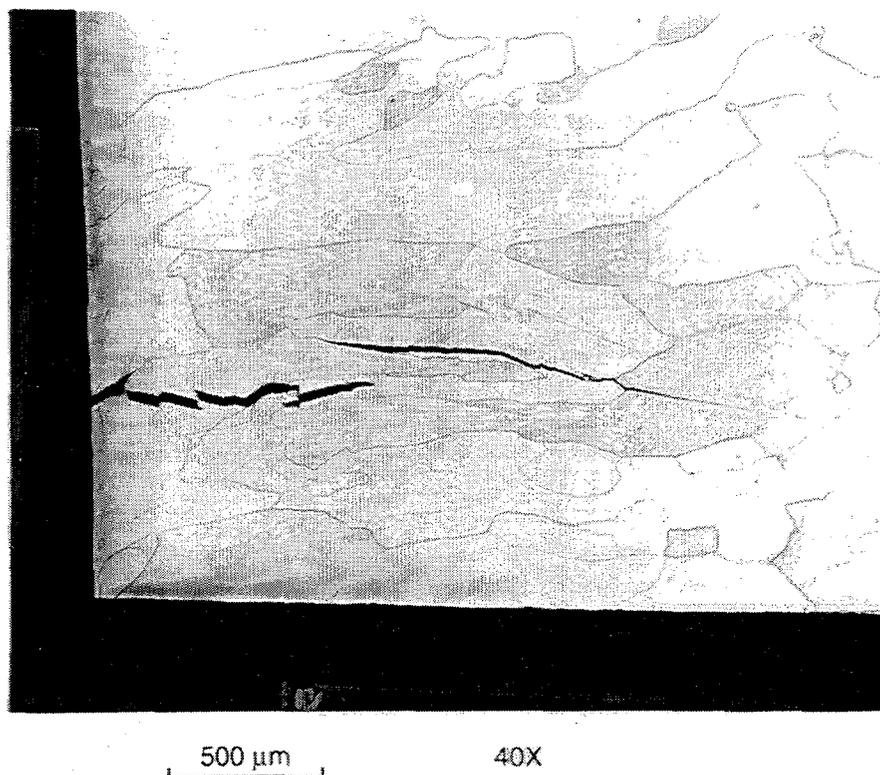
View of fusion zone of weld GTA-10 in V-4Cr-4Ti showing brittle cracking following cutting of metallography sample (sample 96-0218).
